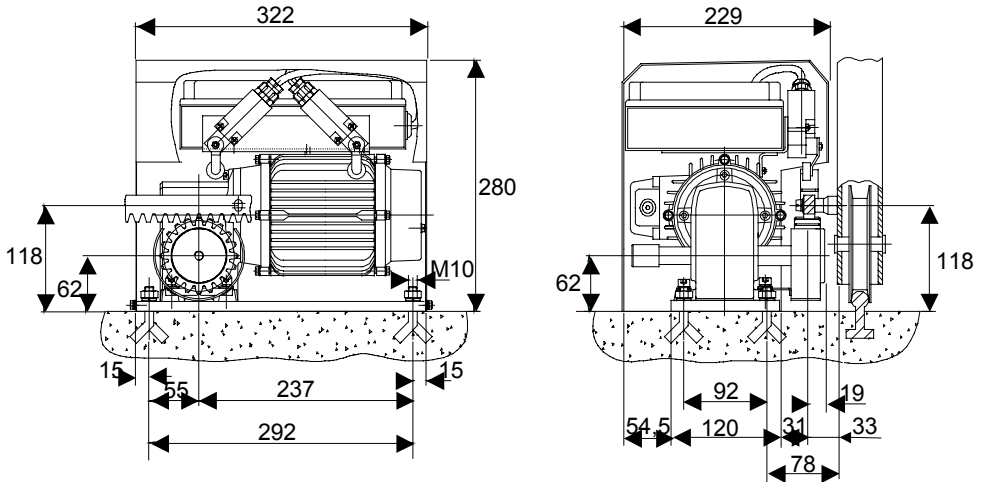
Dimensional drawing for types WS 300/1, DS 400/1, and DS 600/1 with gear rack and gear
